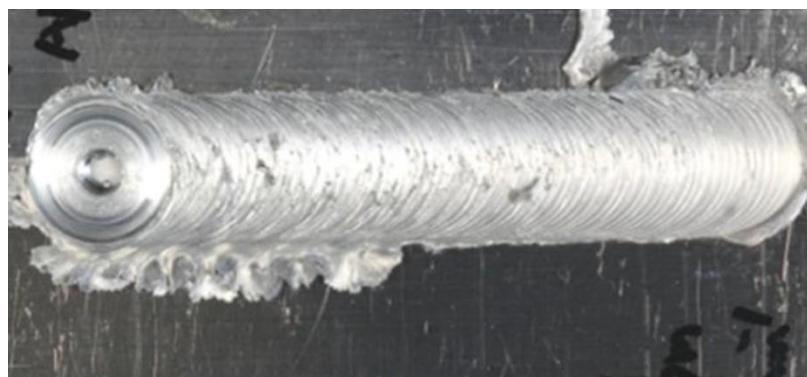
Welded joint with excessive flash [3-22]
